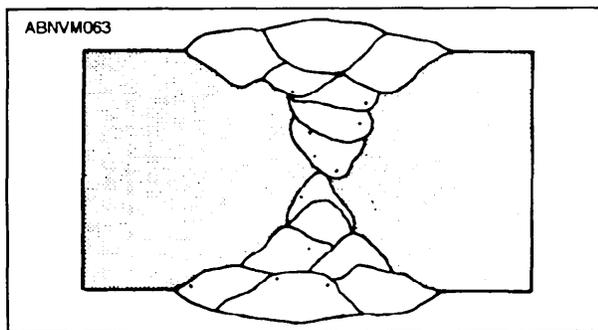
Gross porosity in a multipass butt weld.
